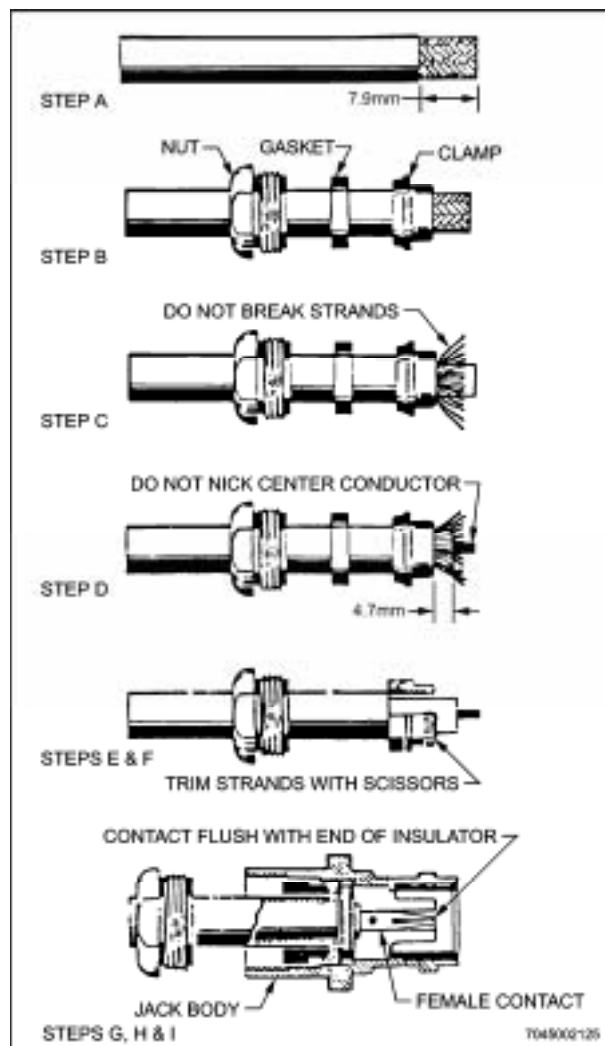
Attaching Improved BNC Connectors to Coaxial Cable
